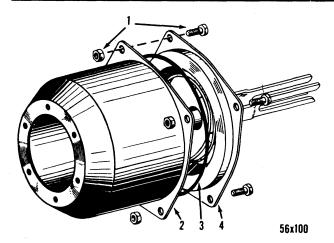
Assembly of Vacuum Cylinder to Piston End Plate Assembly
